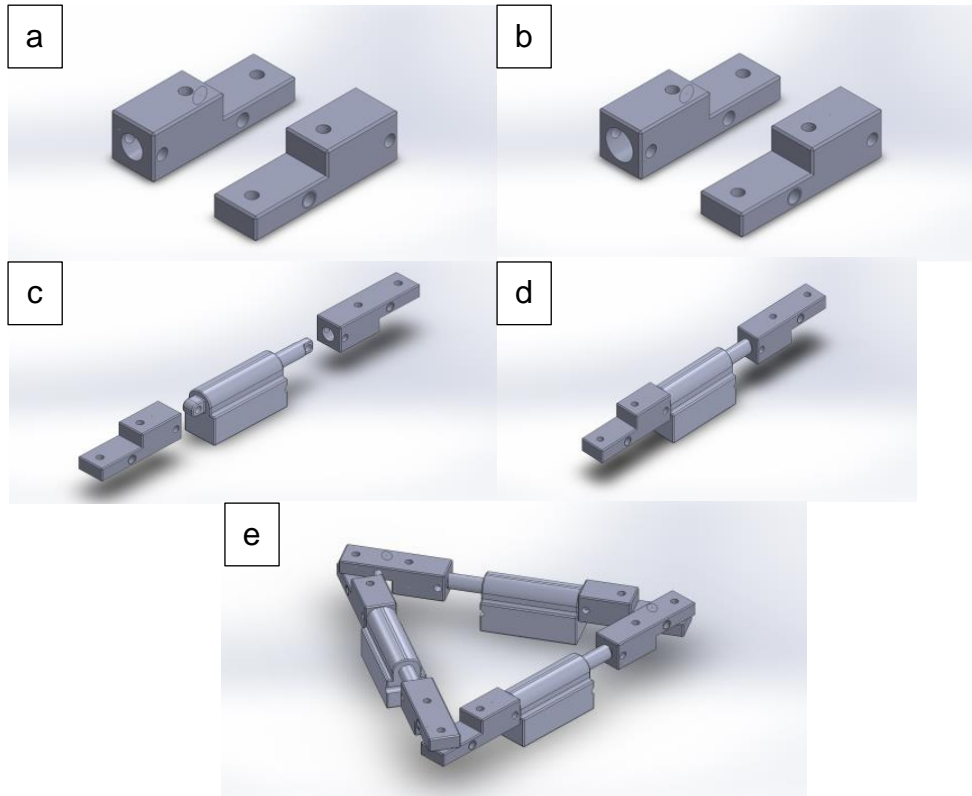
Mechanical parts used to form the top and bottom rings.
